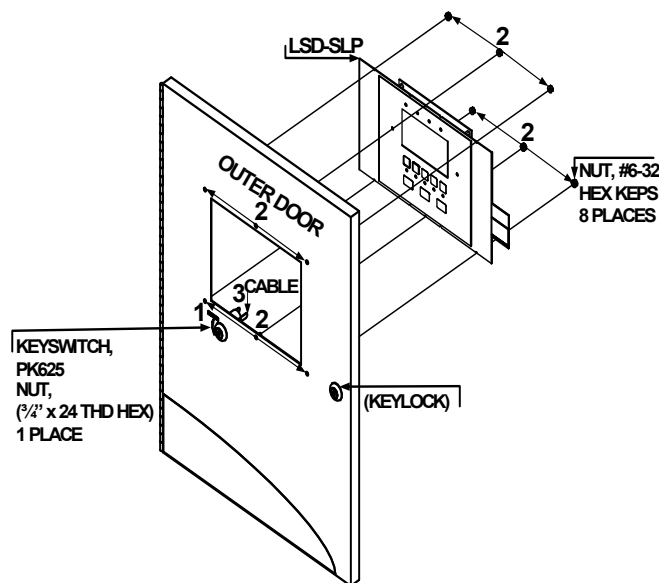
LCD-SLP to S3 Outer Door Installation
